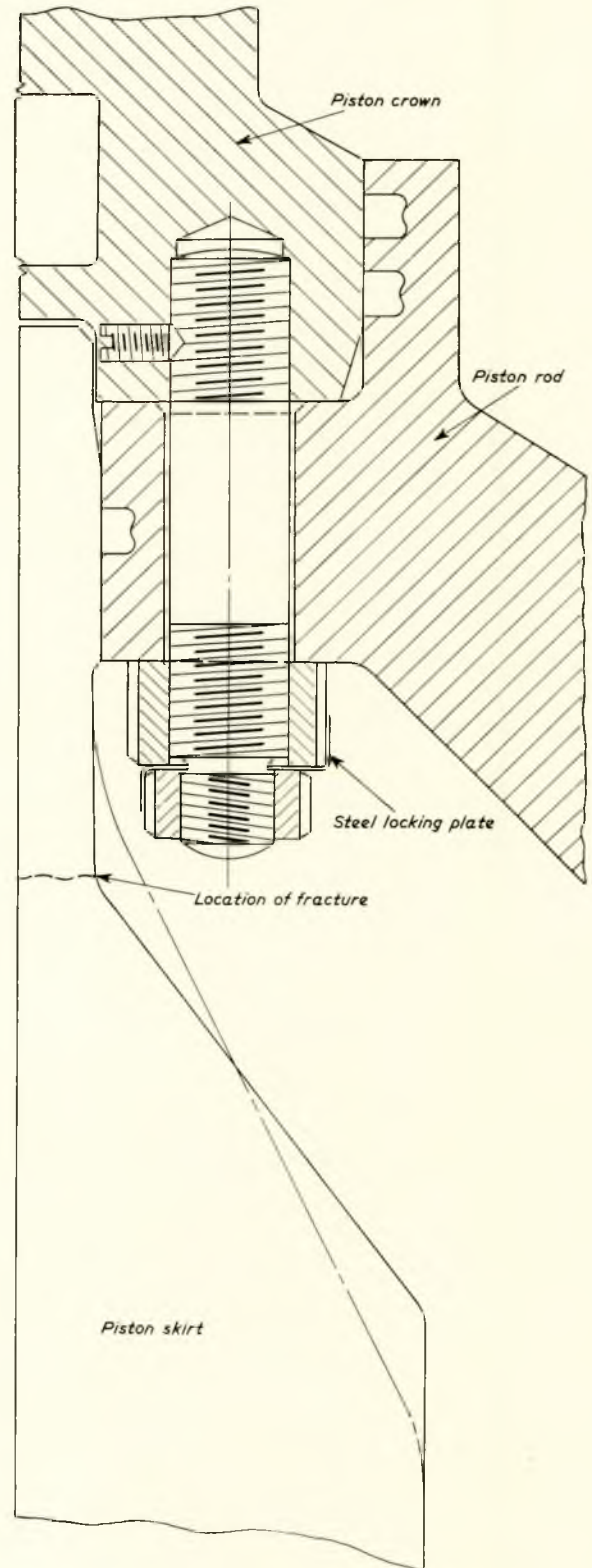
Sketch showing modifications to piston crown studs 2nd top of piston skirt
